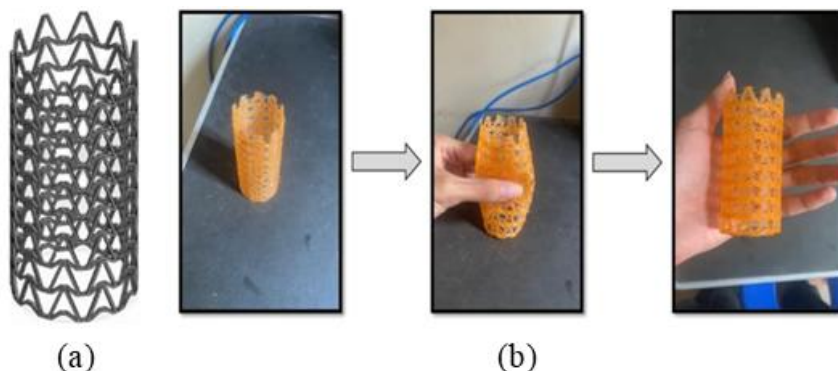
(a) 3D drawing of the stent; (b) Stent fabricated using the 3D printer
